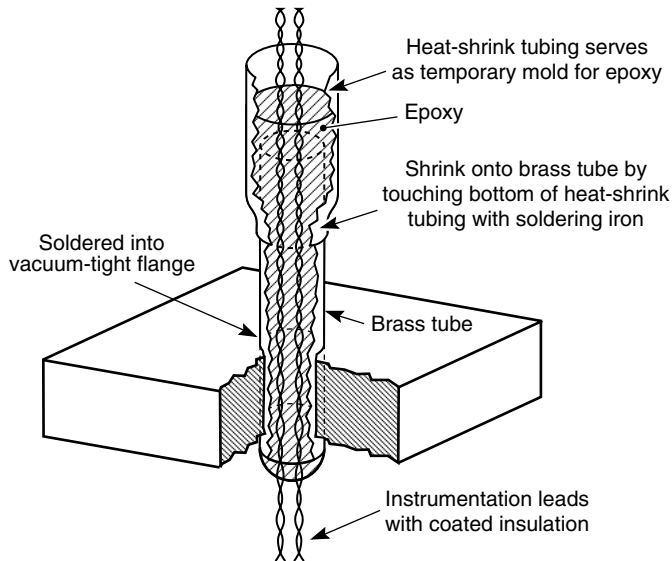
Fabrication technique for cryogenic vacuum-tight electrical lead-through. Heat-shrink tubing serves as a mold for the epoxy and is later removed.
